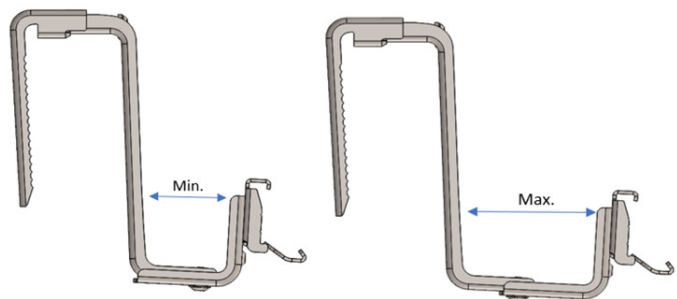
; ClickFit EVO roof hook in its lowest and highest position
